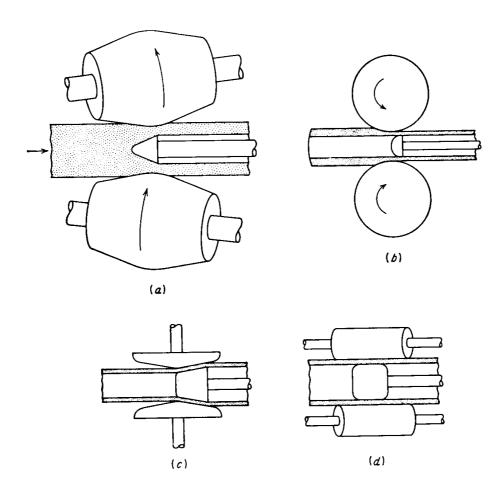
(a) Mannesmann mill, (b) plug rolling mill, (c) three-roll piercing mill, (d) reeling mill.
